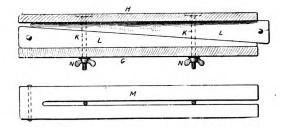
Shaving Wedge Adjustment for Molding Table
